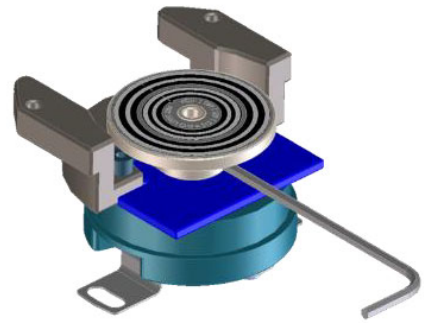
Evaluation Board Sample Mounting Bracket and Bearing Stage
